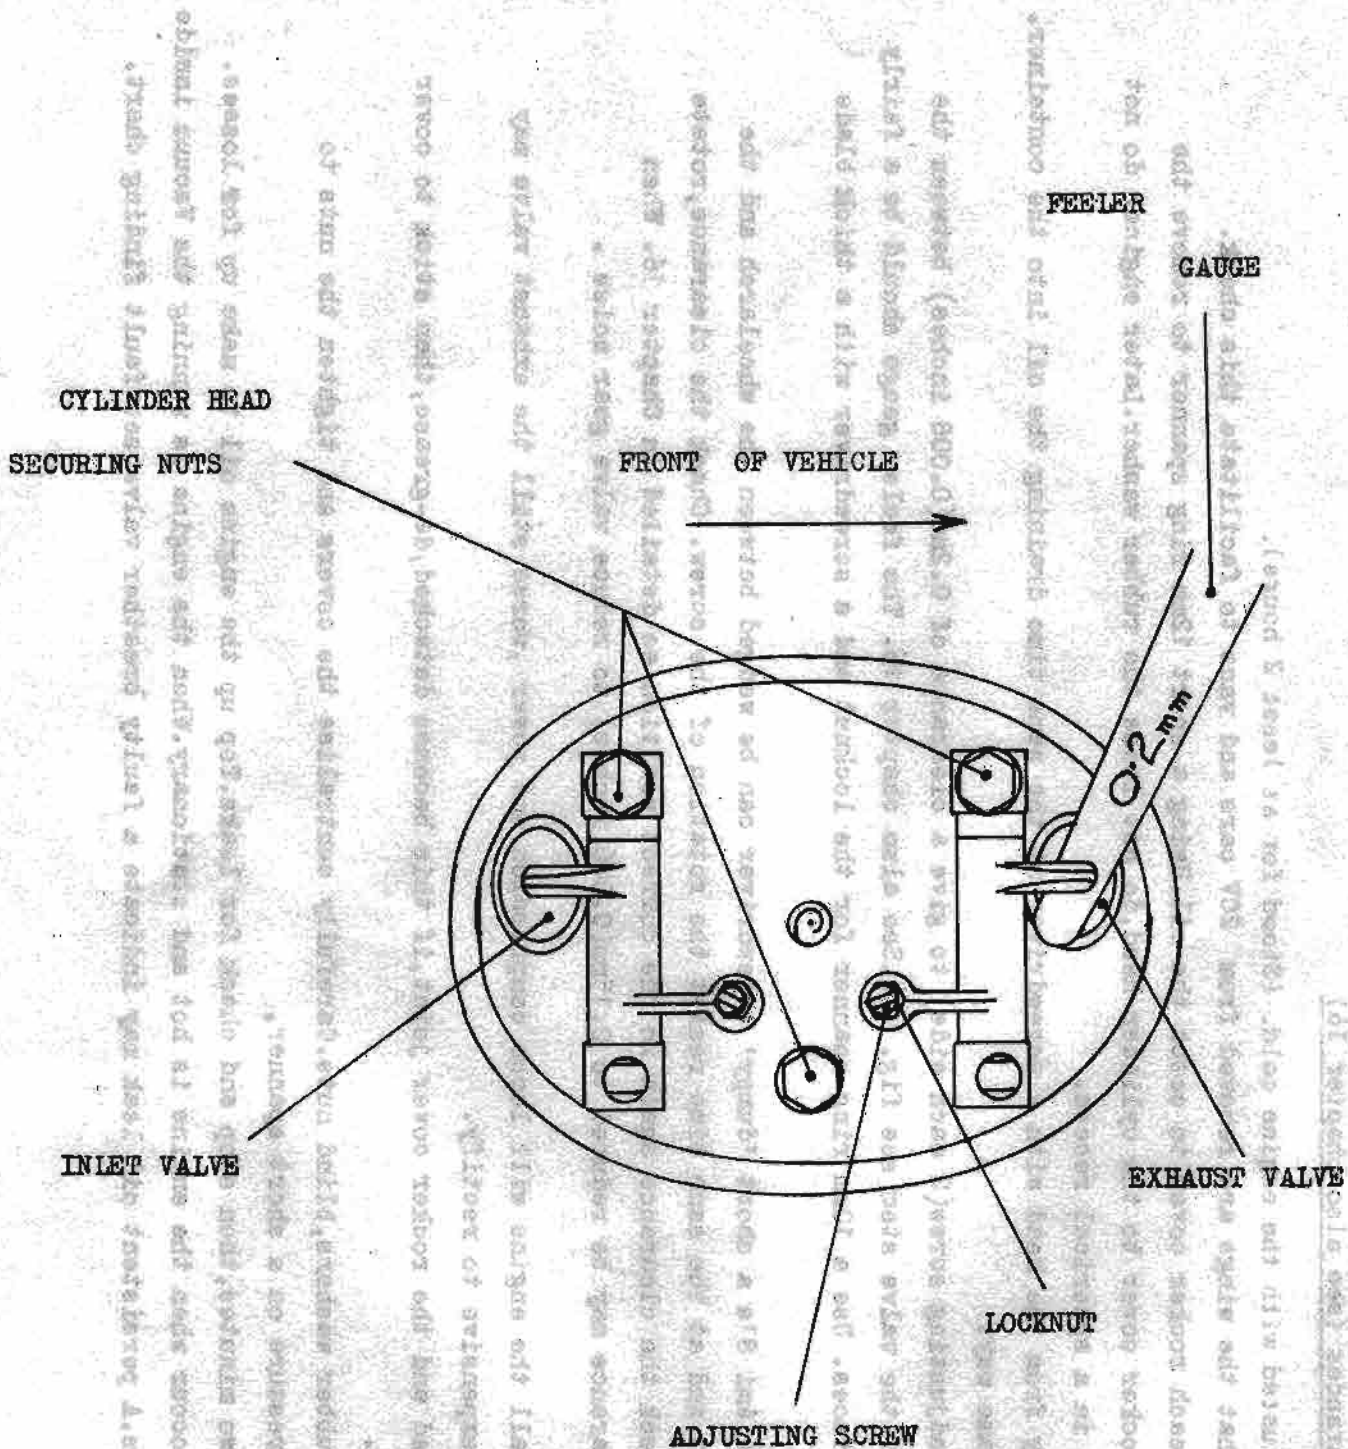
CHECK THE ENGINE VALVE CLEARANCES.
